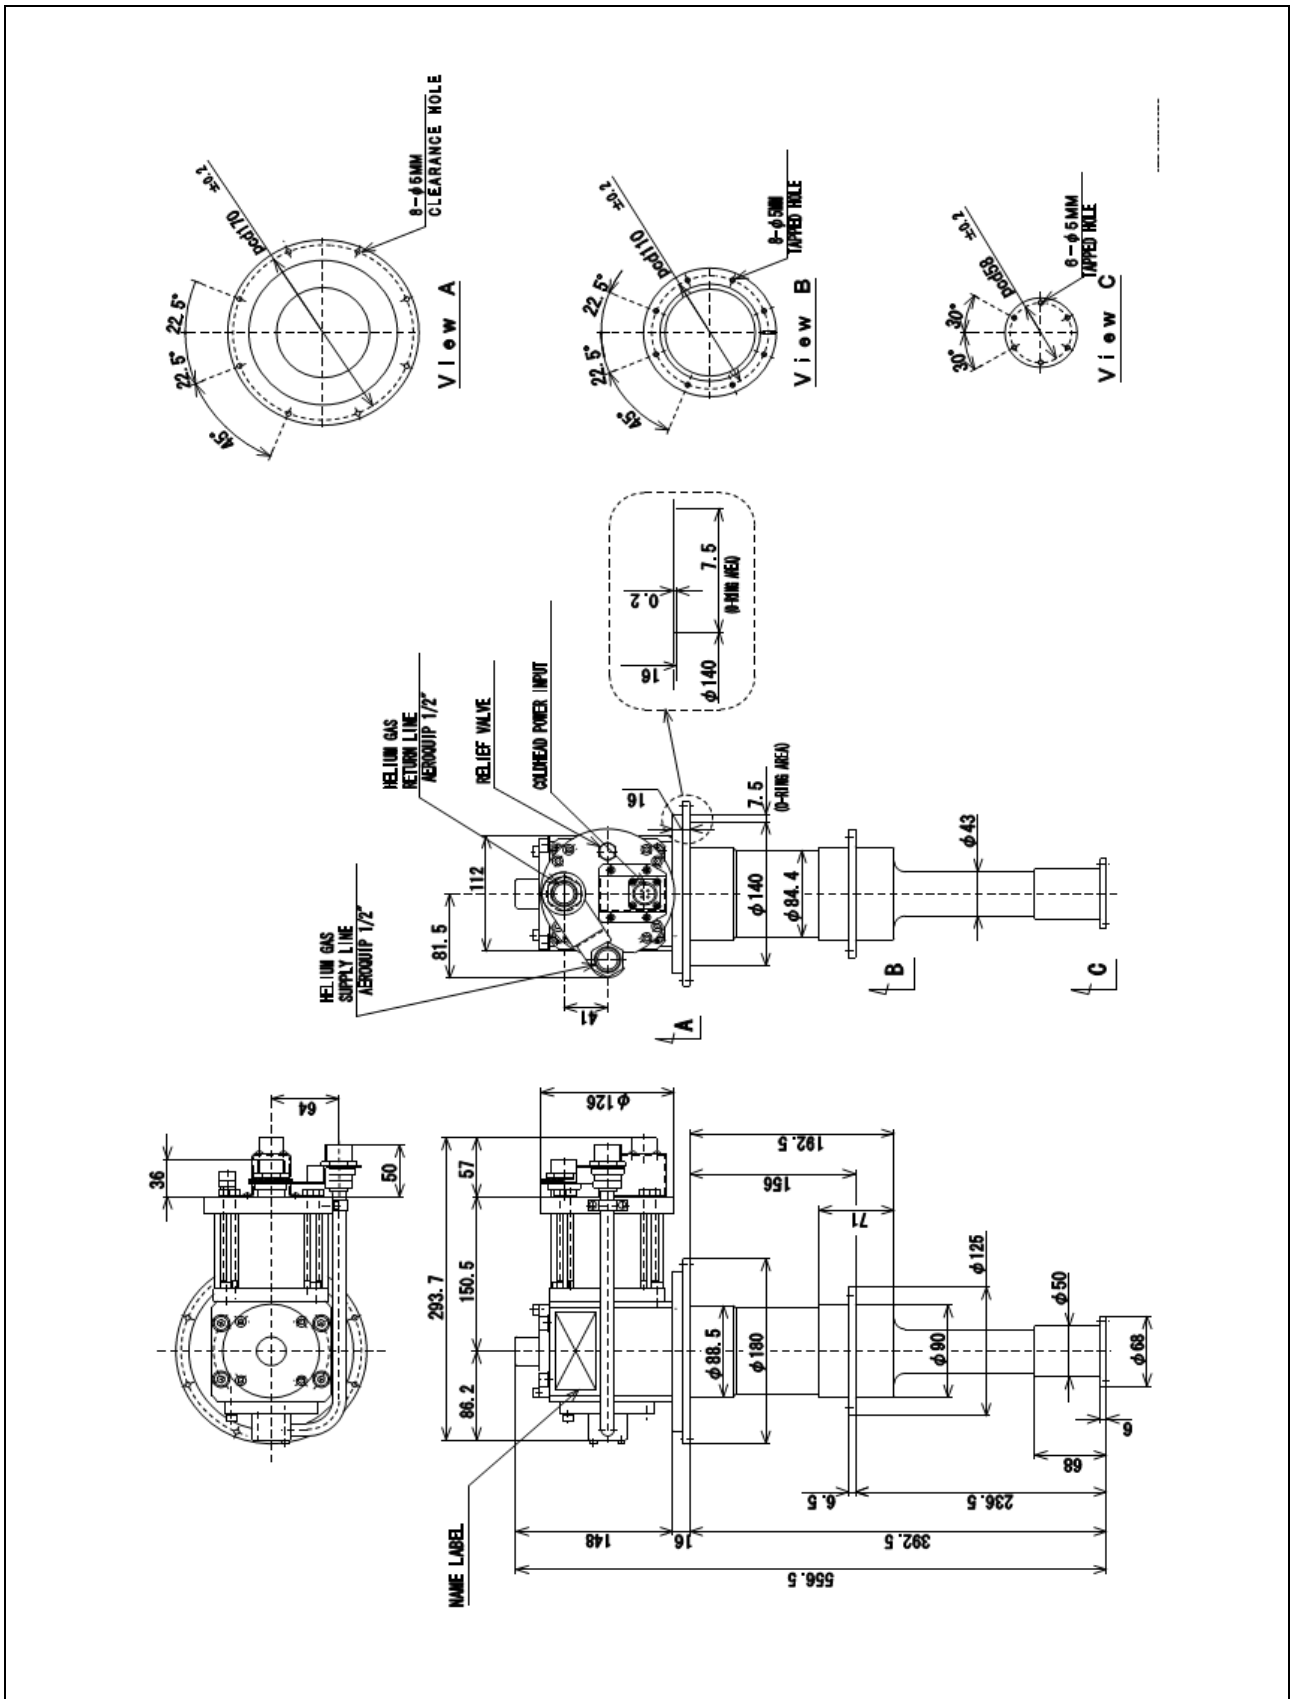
Cold head unit. The dimensions are in millimetres.
